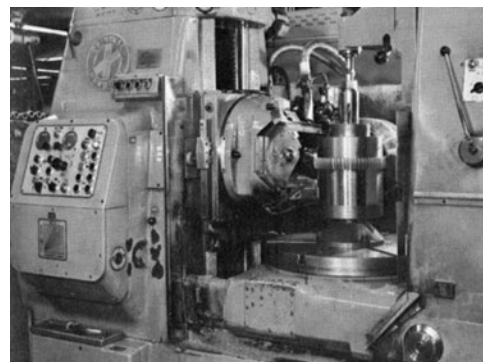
A large coupling hub with external spur teeth that has been precision hobbled on a medium-size hobbing machine. (Courtesy of Sier-Bath Gear Co., Inc., North Bergen, New Jersey.)
